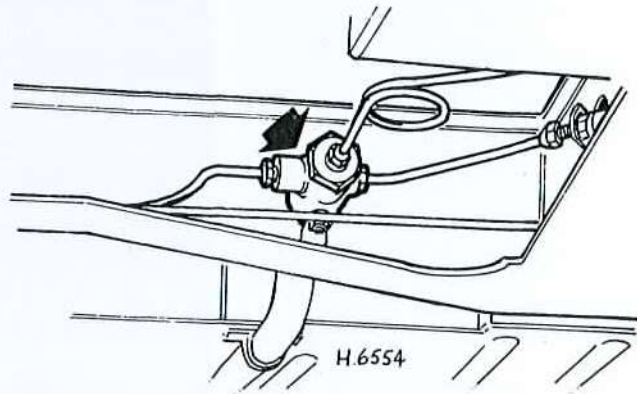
Location of pressure regulating valve on rear subframe (Sec 22)
